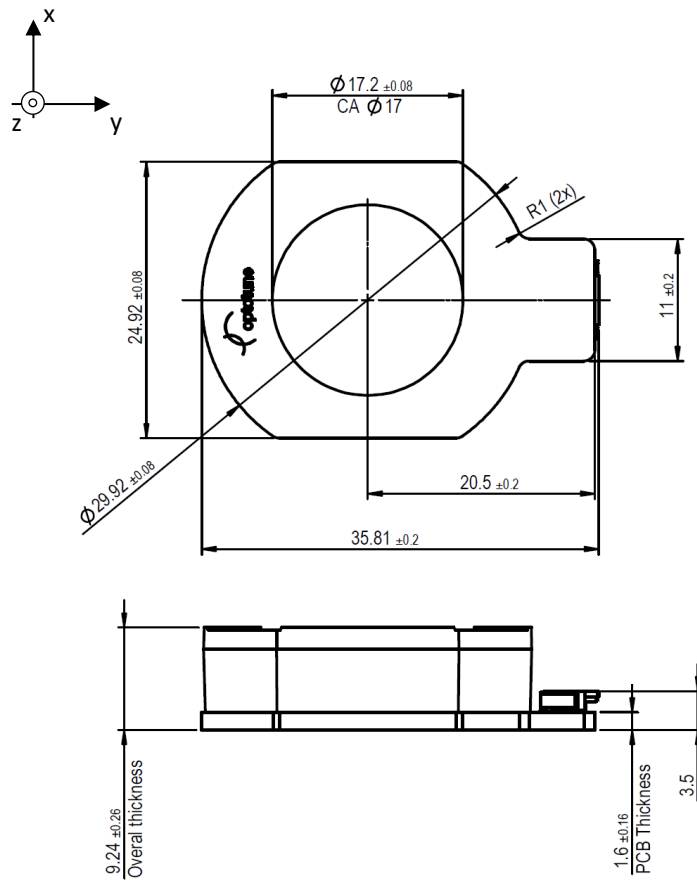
Mechanical drawing of the TP-17-25 (unit: mm).
